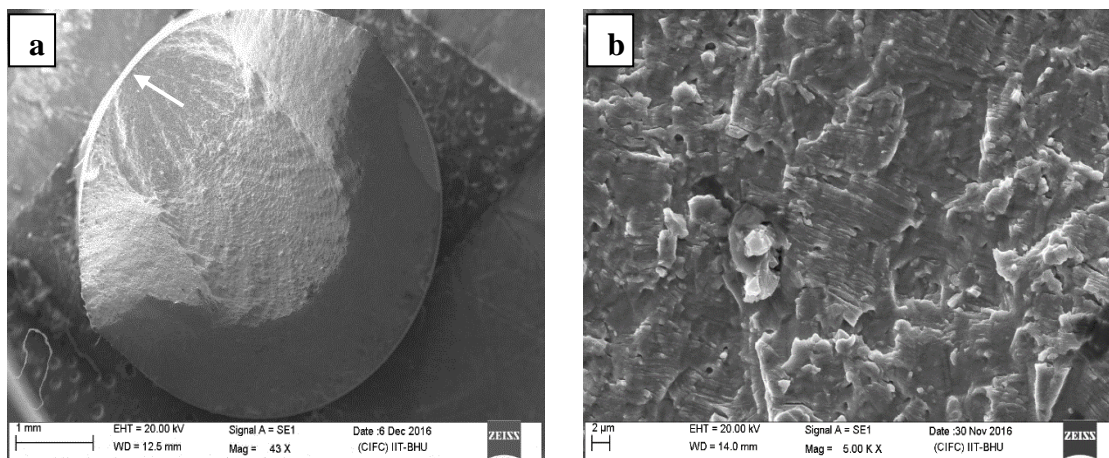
6: Fractographs of the sample fractured at the mean stress of 750 MPa ($R = 0.5$) at 600°C showing: (a) the fracture surface and crack initiation site, (b) transgranular crack propagation and fatigue striations.
